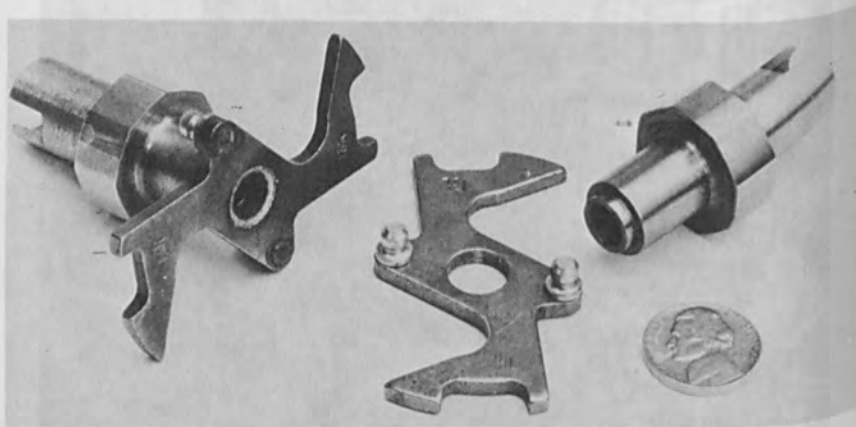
Distributor Cam Assembly for 4, 6, & 8 Cylinder FORD Automobiles: (l.) Welded Assembly; (r.) Assembly Detail Parts.
